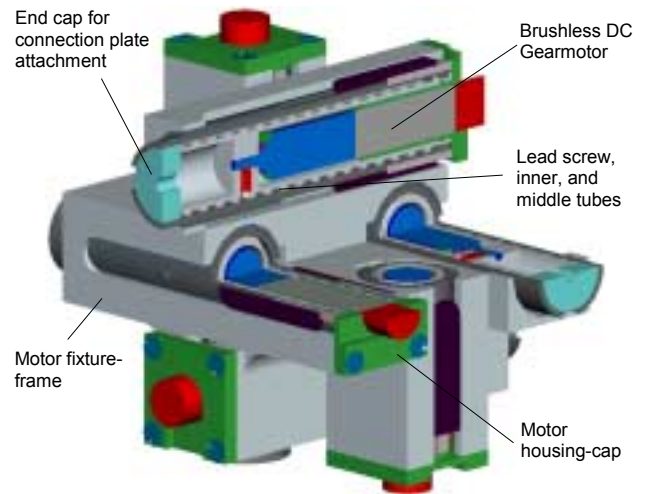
CAD solid model showing the *Telecube's* motor core with six telescoping tube linear actuators installed in a cut-away view.
